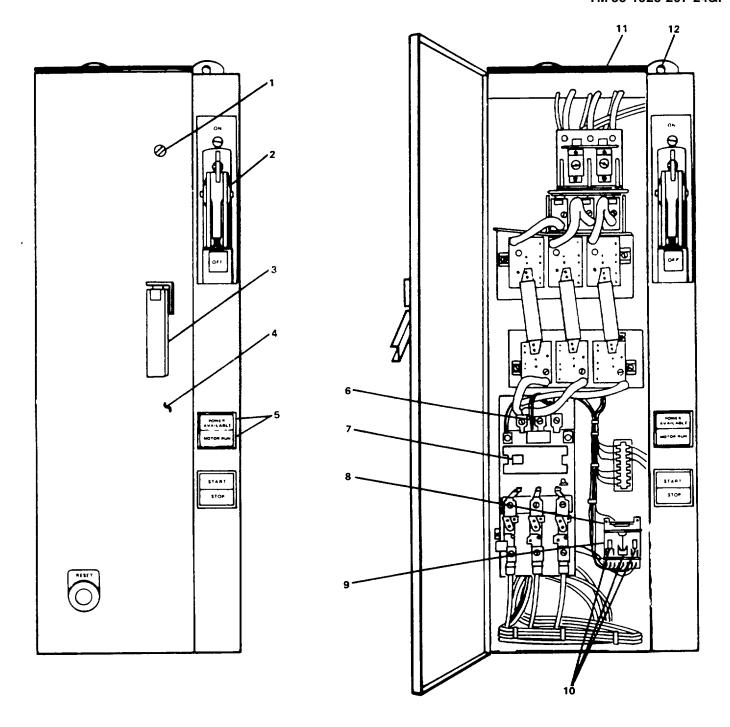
Motor Controller (Fire and General Service Pump #2).
